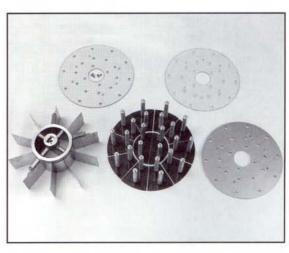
Divider Blade Assembly may now be removed, but need not be disassembled further.
